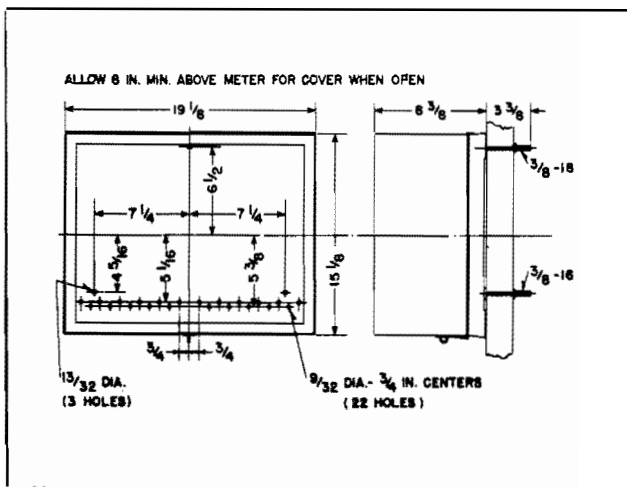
Outline Dimensions, Types RI-2, -7, -8, 10 Meters with Hinge Covers.
